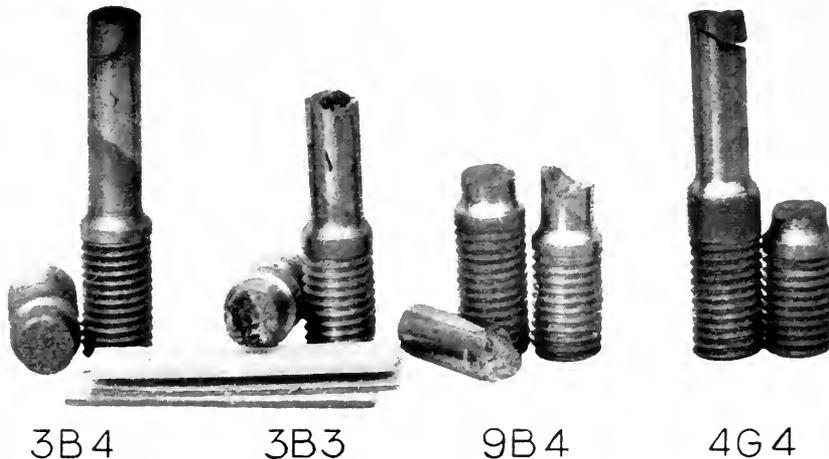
Four Welded Specimens of Fig. 12 after Testing, showing Fractures
